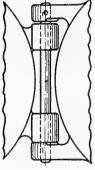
A poor design wherein all the thrust is taken on the lower case lug and the span of the cover lug is reduced.
